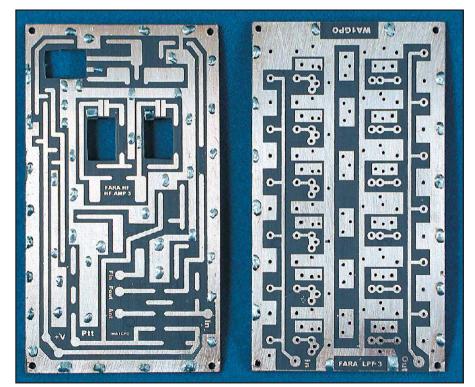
The circuit boards before wiring. The RF board is on the left and the LPF board is to the right. Note the pinned and soldered holes.
